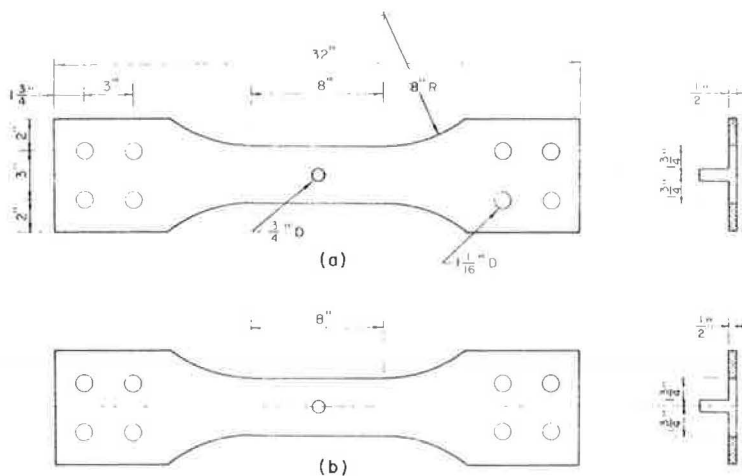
Dimensions of small plate specimens: (a) GIA specimens, and (b) GIB specimens.
